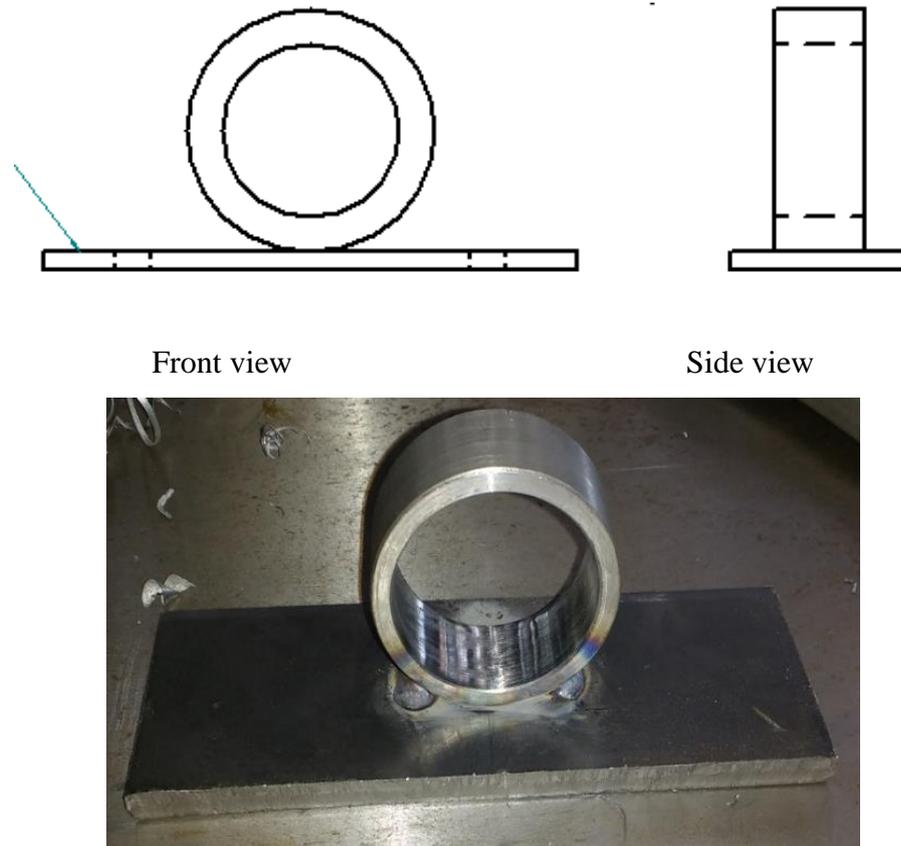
Front view, side view and fabricated part of the screen holder
